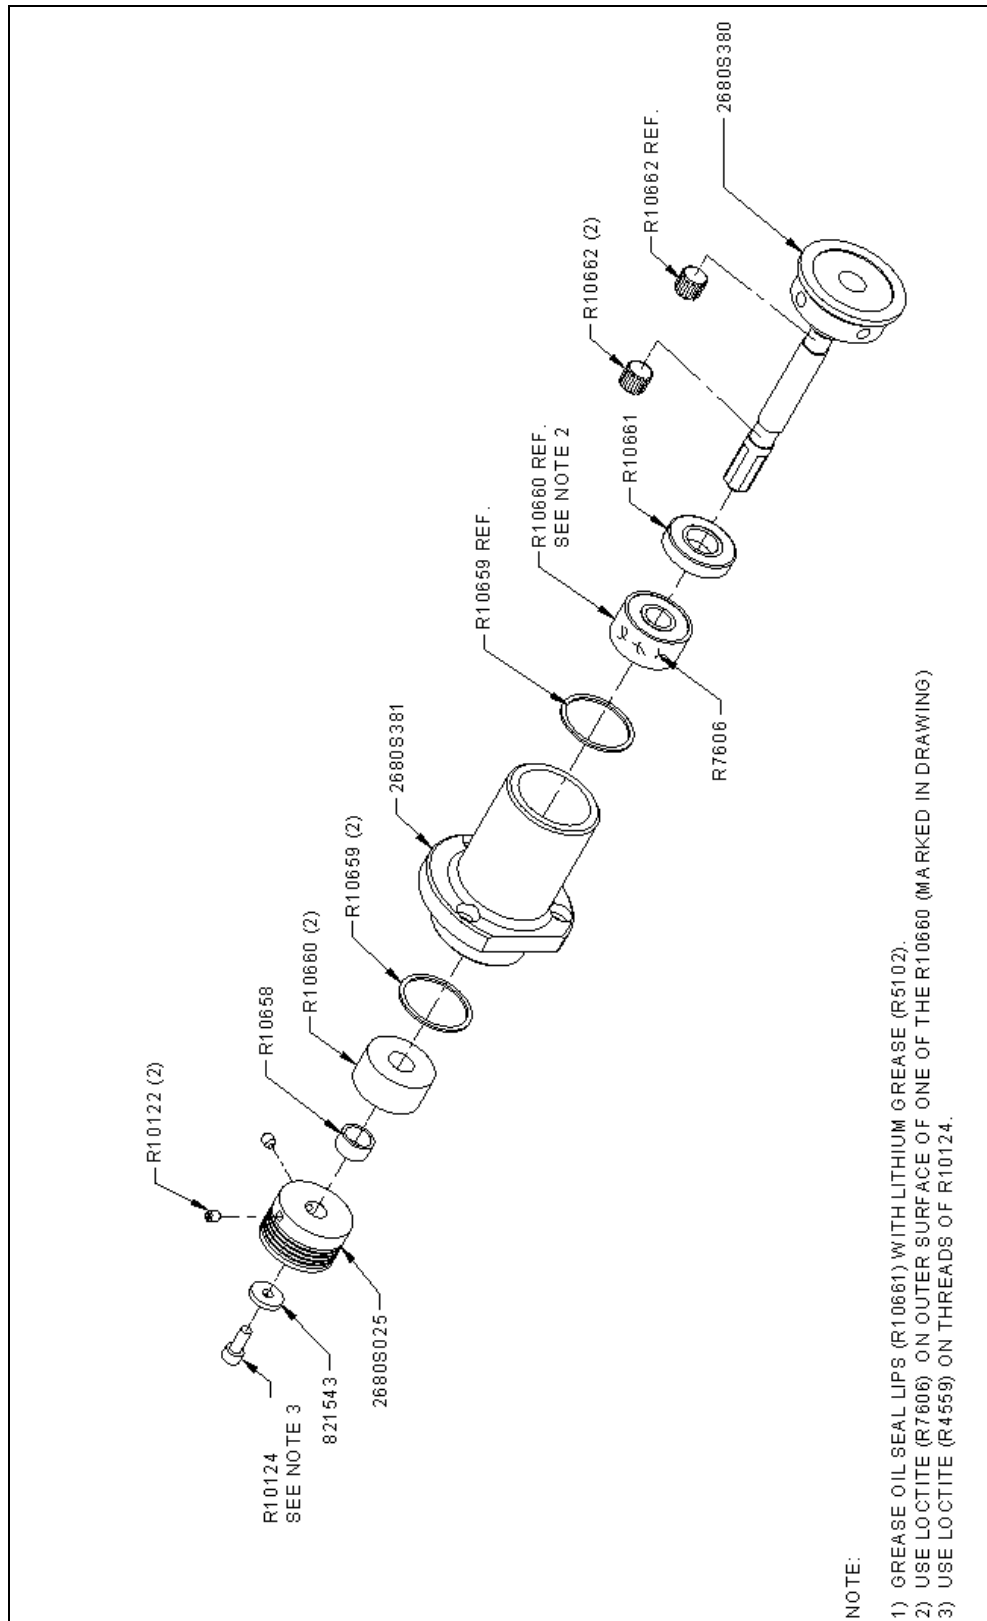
Spindle Sub-Assembly Diagram (2680S806)
